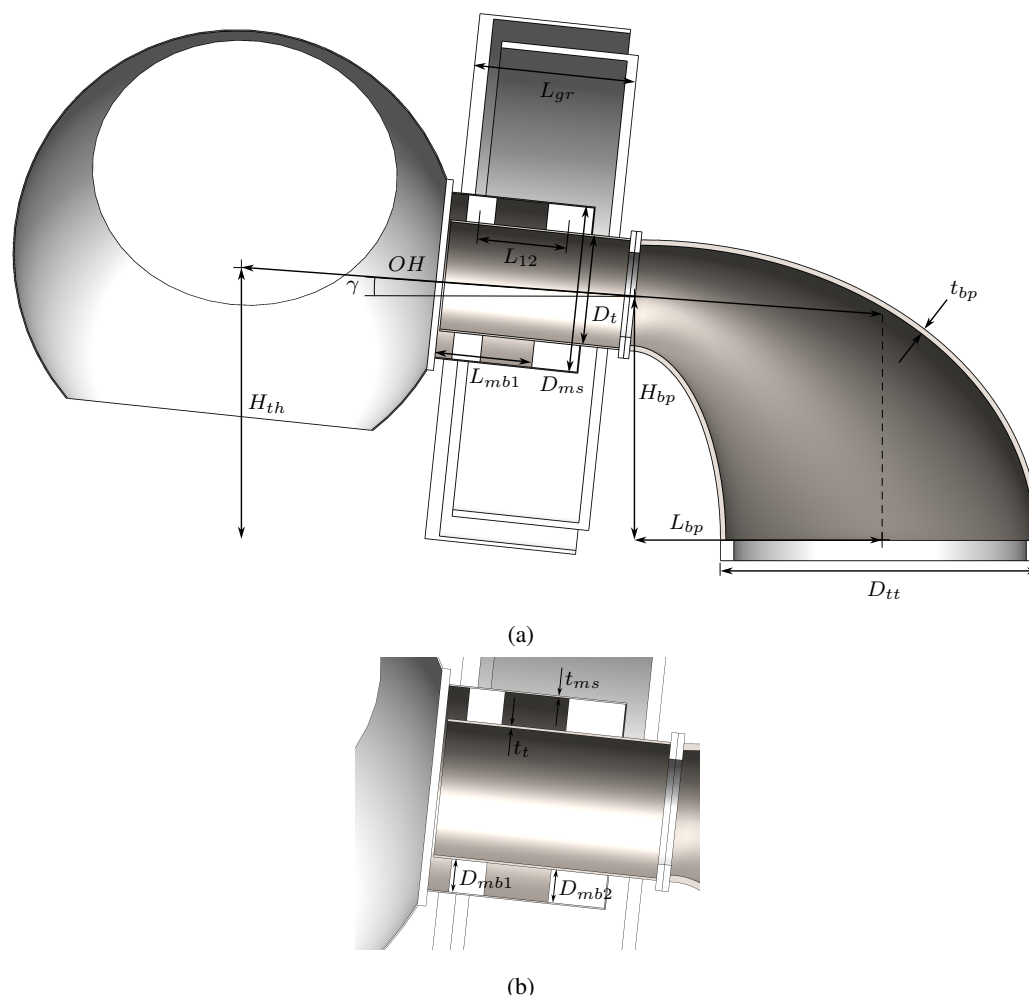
CAD illustration of the drivetrain; dimensions are documented in Table 10.
